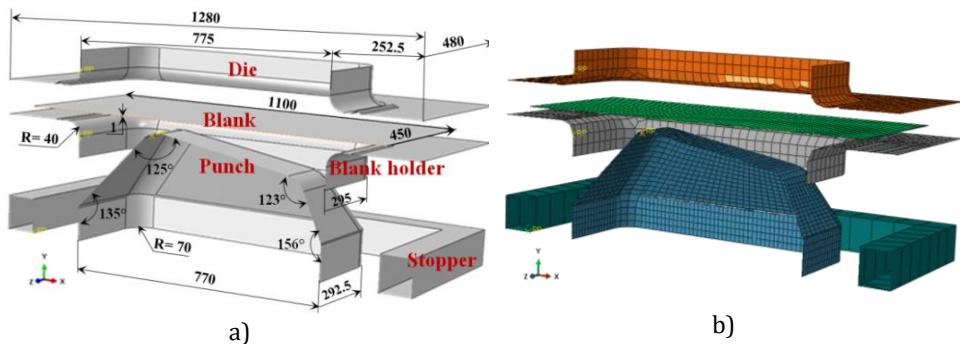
Forming tools and blank, a) Drawing and b) Meshing
